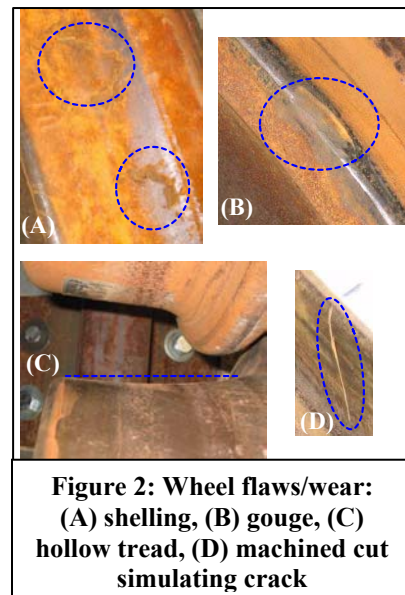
Wheel flaws/wear: (A) shelling, (B) gouge, (C) hollow tread, (D) machined cut simulating crack
